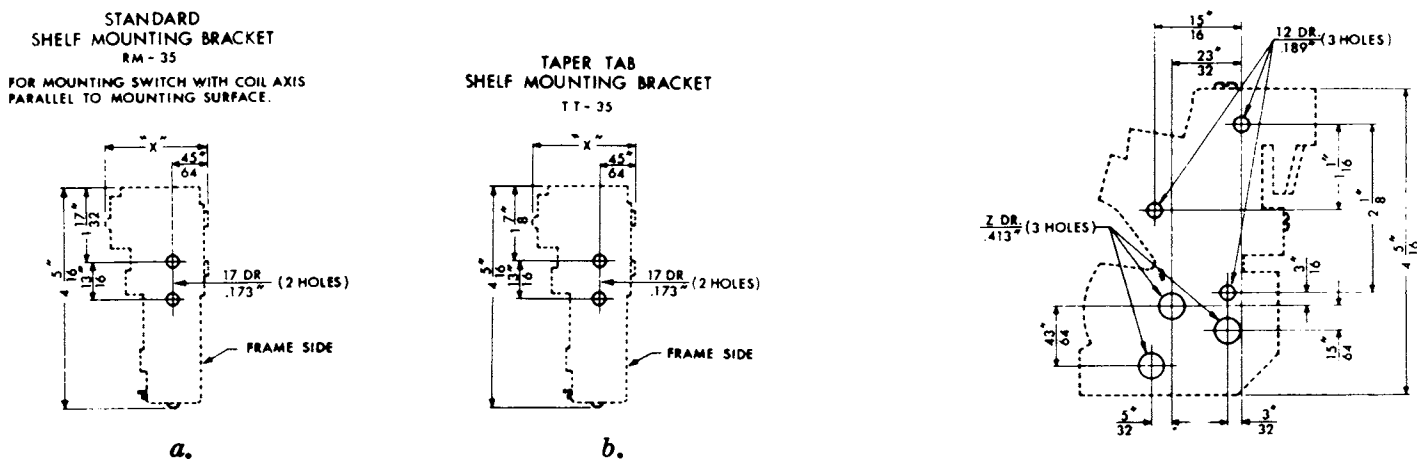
Type 40 and type 44 rotary switch shelf mounting bracket.
